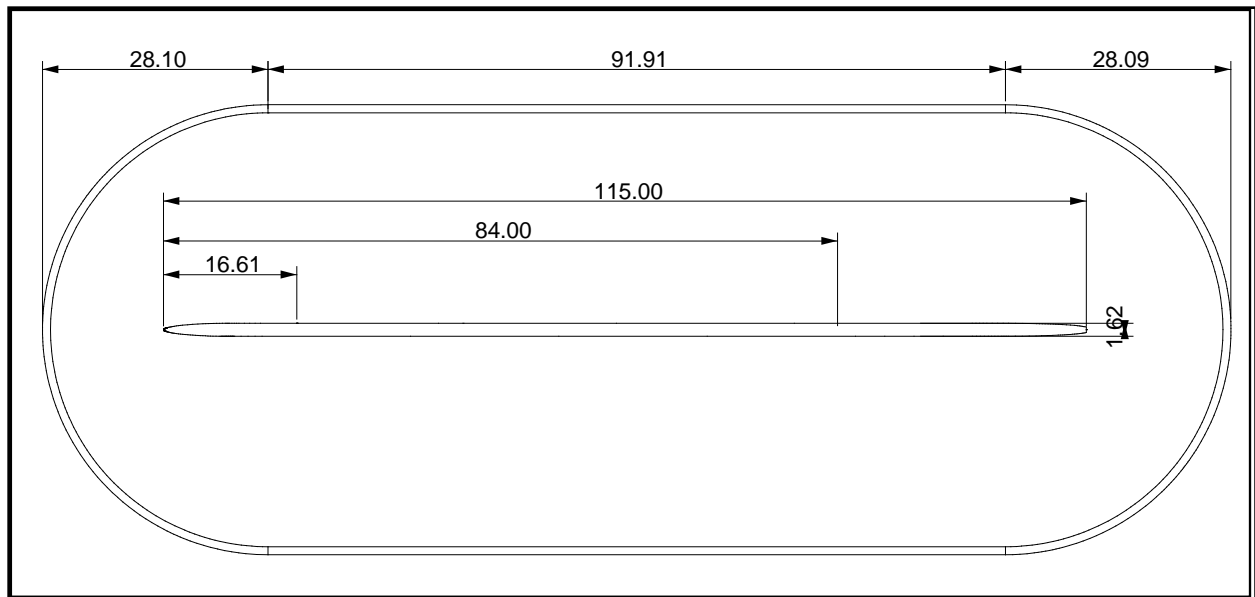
Top view of Gradient-Zero model showing splitter plate (dimensions in inches).
